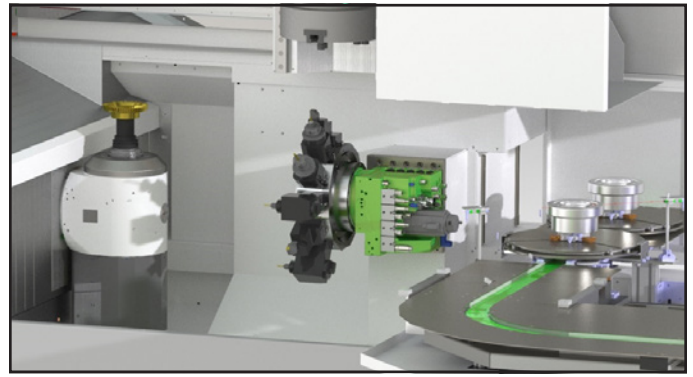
Work area of the CNC turning machining center HESSAPP DVH 500 L WS - view into the work area (suspended workpiece spindle, swiveling tool spindle, tool turret with a.o. driven tools - direct loading/unloading with the workpiece spindle (pick-up)).
